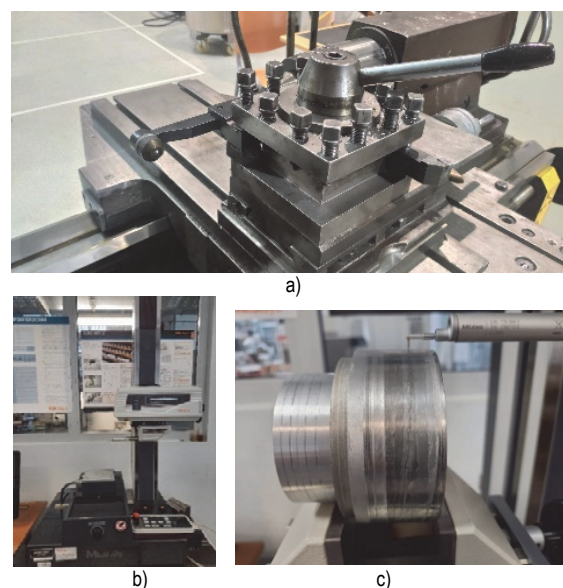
Ball burner clamped in the lathe tool post (a); Mitutoyo SV-3200 profilographometer (b), measuring tip and burnished sample (c)
